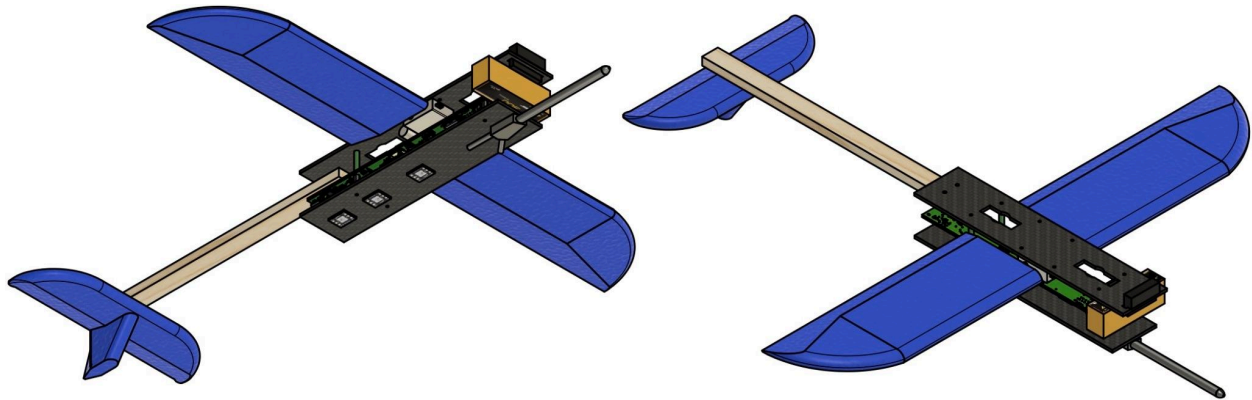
Assembled Glider Isometric Projection in Autodesk Fusion 360 CAD
